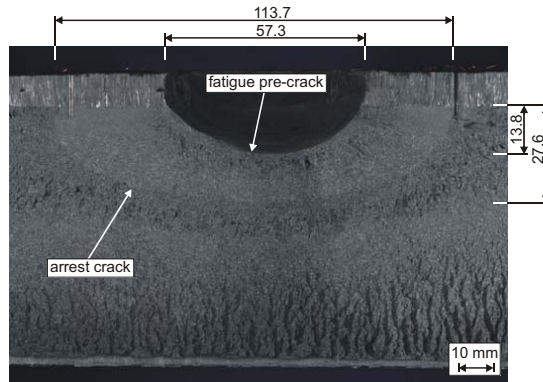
Fracture surface of the specimen with through-clad (surface) crack.
